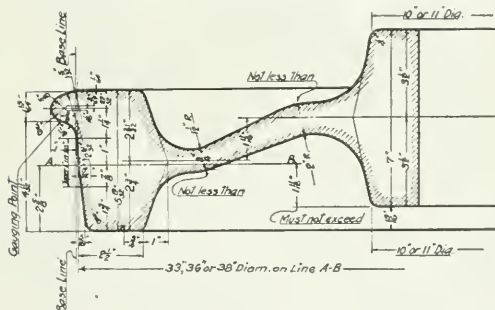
in., 36 in. or 38 in. Solid Steel Tender Wheels
